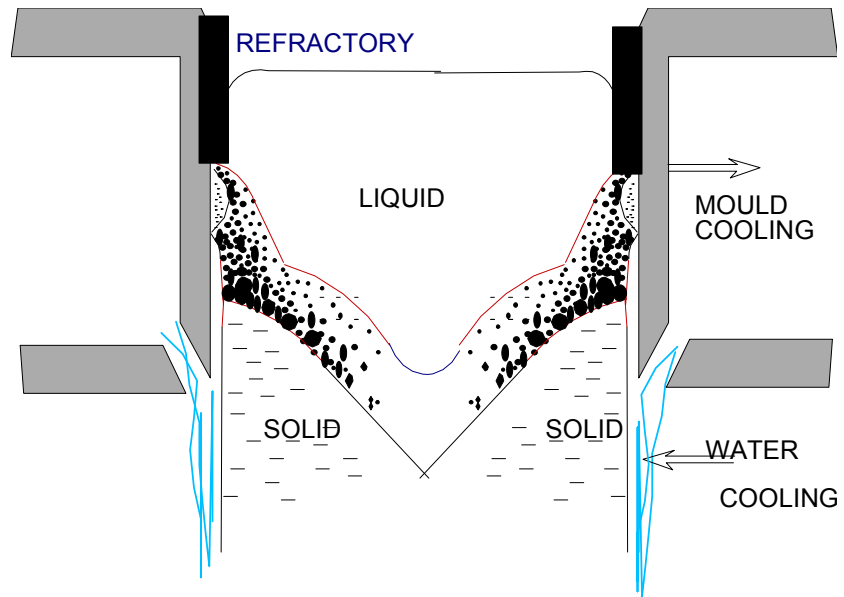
Simple hot top mould formed by addition of thin insulating paper to an open top mould.
